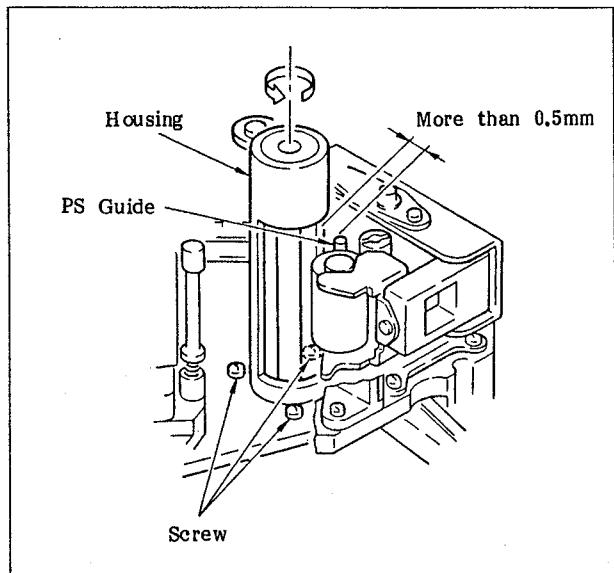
Adjustment of the Position of the PS Guide Assembly (1)
